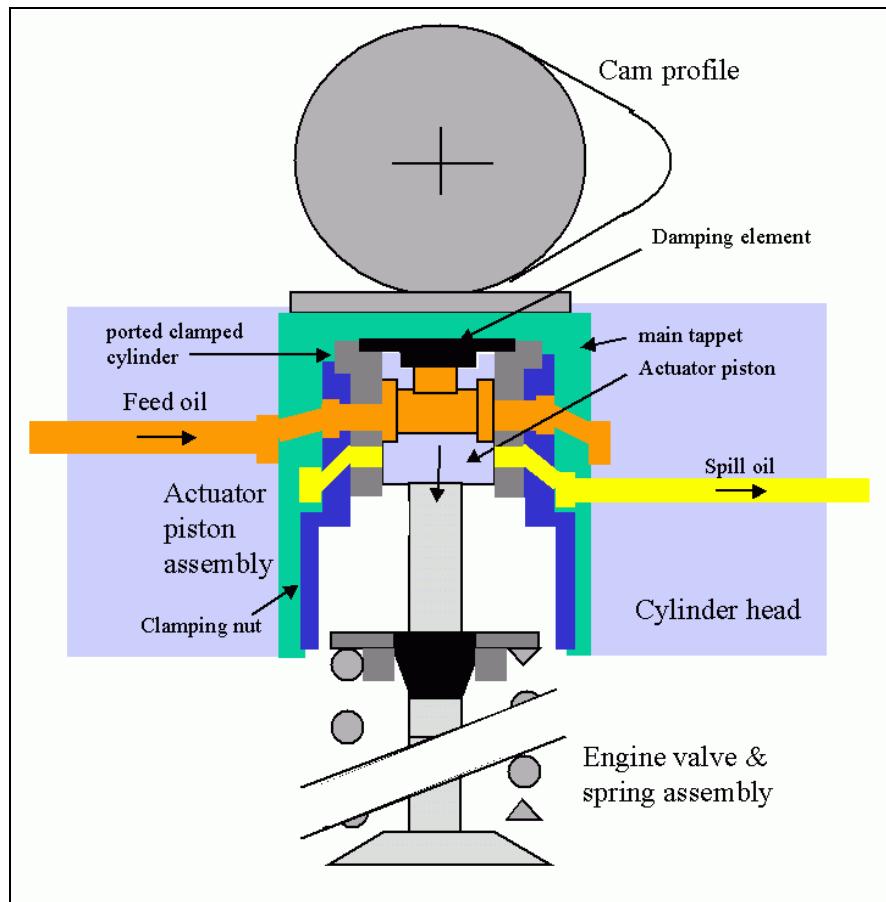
Design Layout of Direct-acting Valve Mechanism
